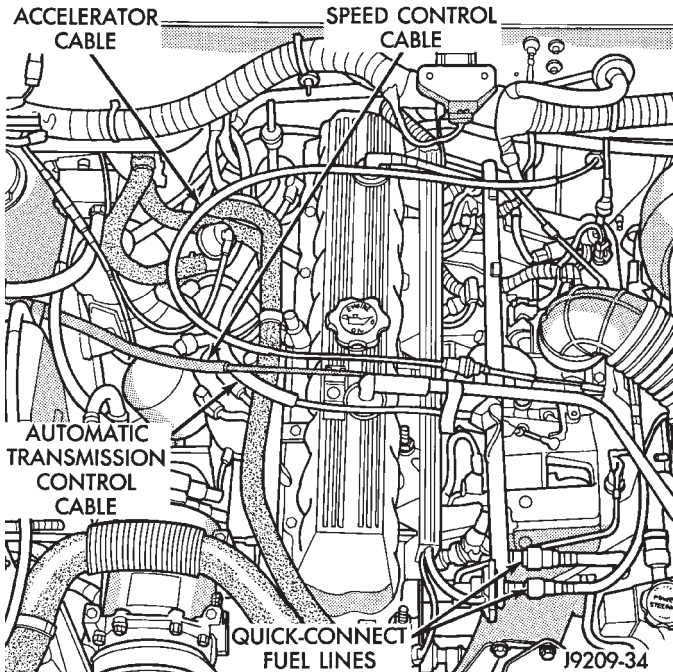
Accelerator Cable, Vehicle Speed Control Cable, Automatic Transmission Control Cable & Quick-Connect Fuel Lines
